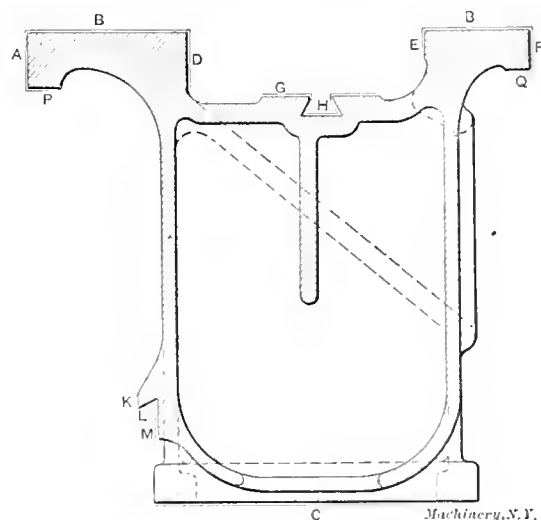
Cross-section of the Bed, the Surfaces to be Finished are Indicated by Double Lines.
